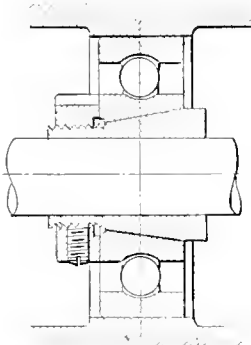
Adapter Bearing for Shafting Varying from Standard Size.
